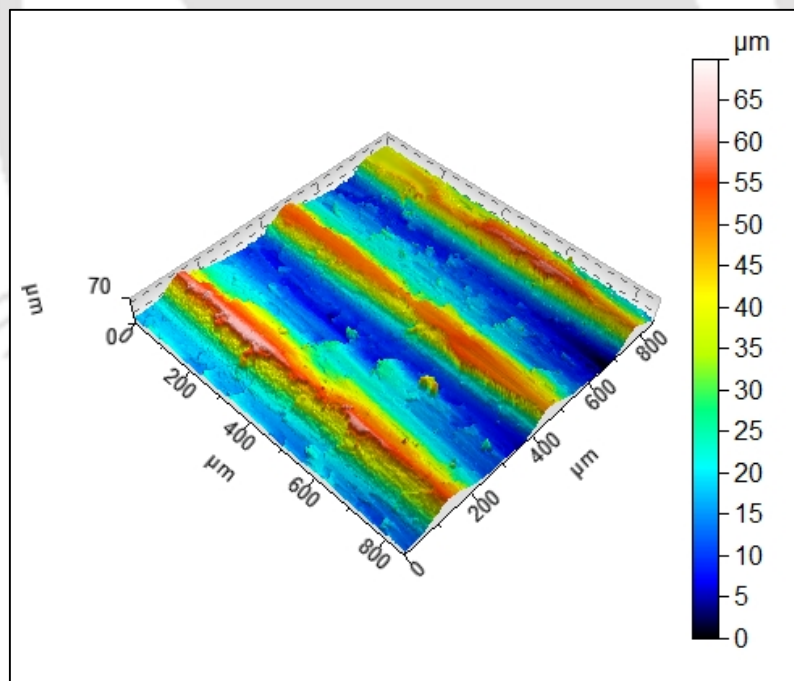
(c) Machined surface made by WC-Co-5 wt.% CaF_2 (80 m/min) under non contact three dimensional profilometer
